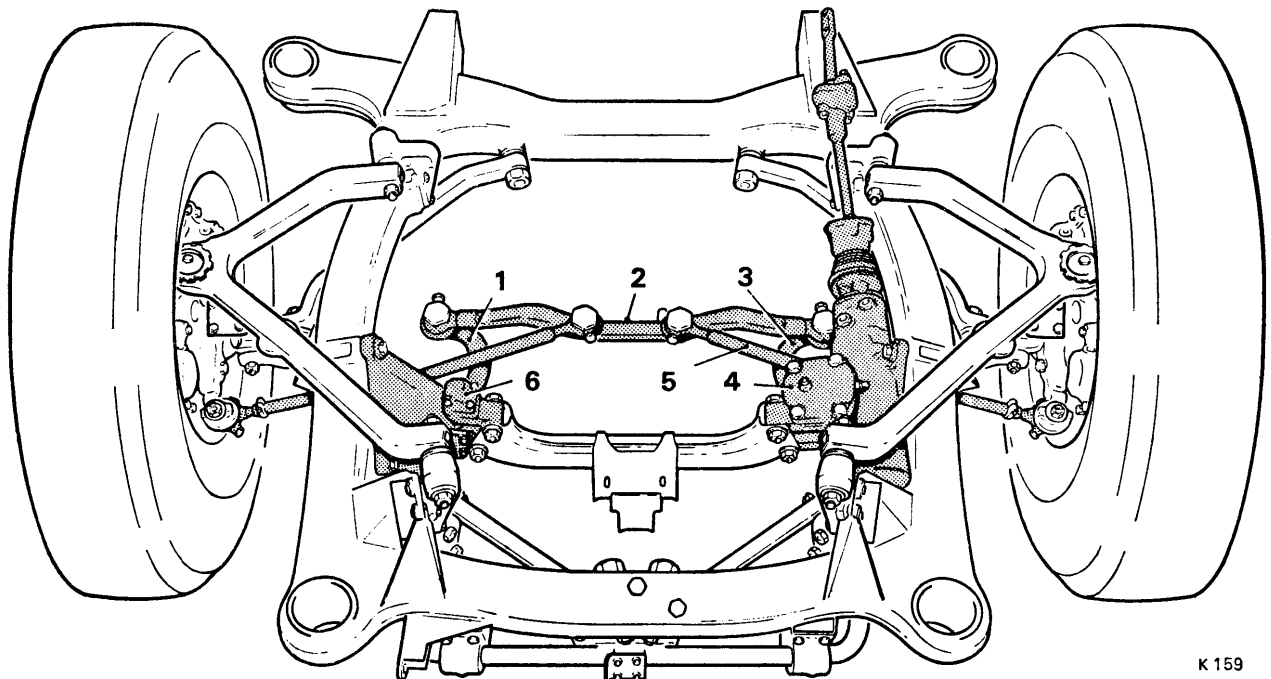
STEERING LINKAGE AND IDLER/DAMPER
